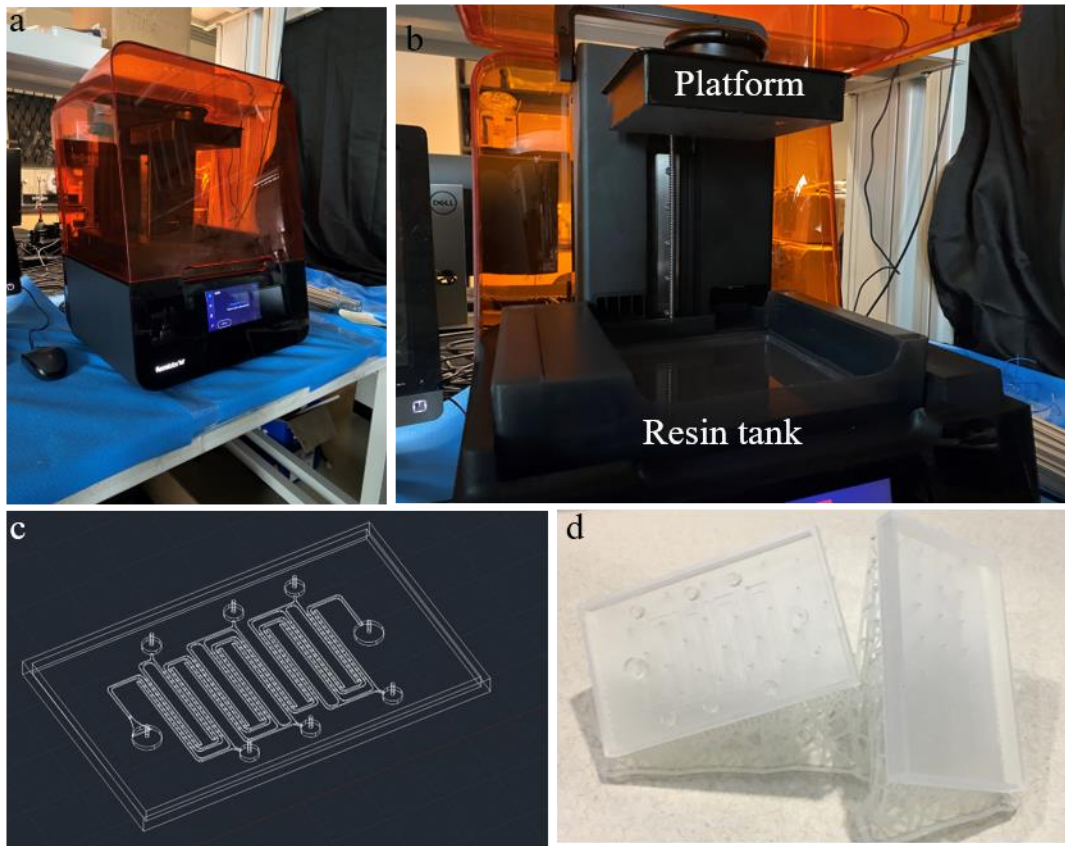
Process of 3D printed mold manufacturing. (a) Formlabs 3D printer. (b) The platform for 3D printed product and resin tank. (c) AutoCAD design; the dimensions of the device are  $46\text{mm} \times 76\text{mm} \times 3.5\text{mm}$ , channel width:  $0.6\text{mm}$ , channel height:  $0.3\text{mm}$ , cliff height  $0.05\text{mm}$ , channel length  $254\text{mm}$ , inlet and outlet diameter:  $6\text{mm}$ . (d) Product from the 3D printer.
